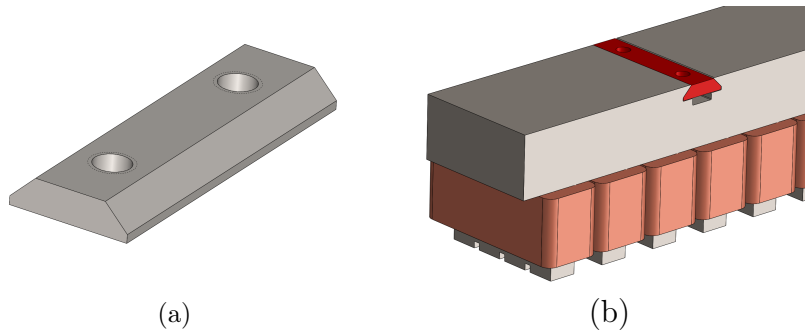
Fixture of motor stator. (a) CAD model of dovetail-shaped nut for motor stator fixture. (b) Dovetail-shaped nut in stator yoke.
